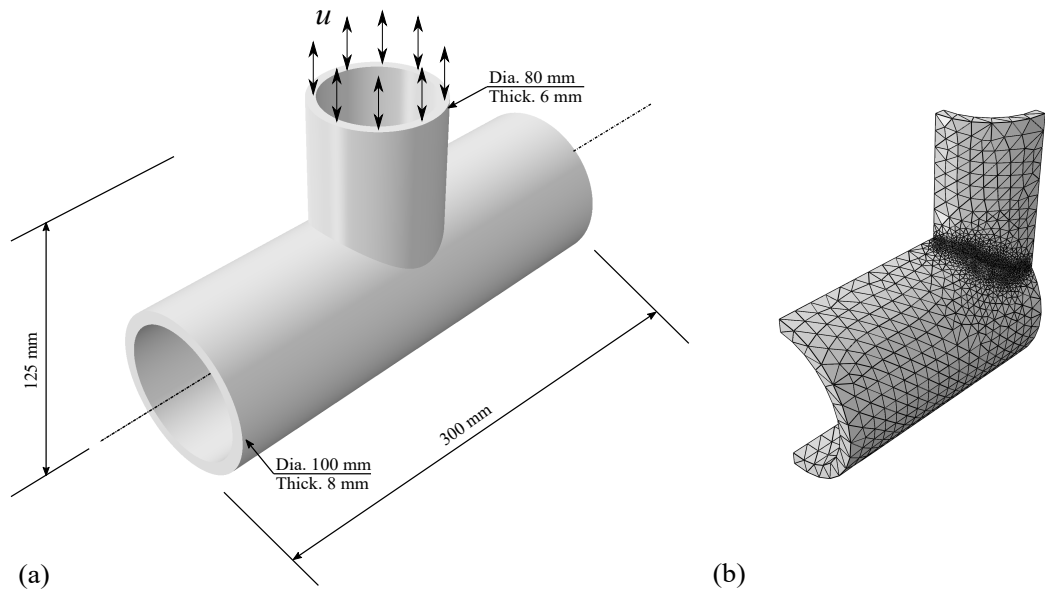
3D pipe-to-pipe connection subjected to cyclic axial load: (a) Geometry and (b) finite element mesh.
